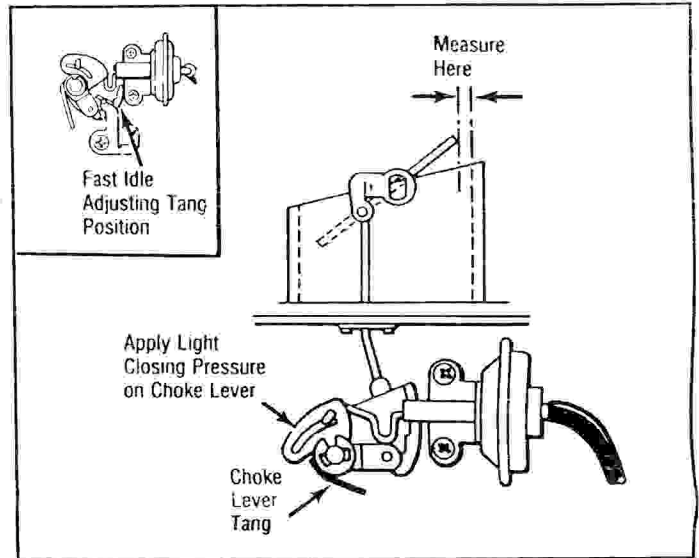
Fast Idle Cam Adjustment (Remote Choke Models)
